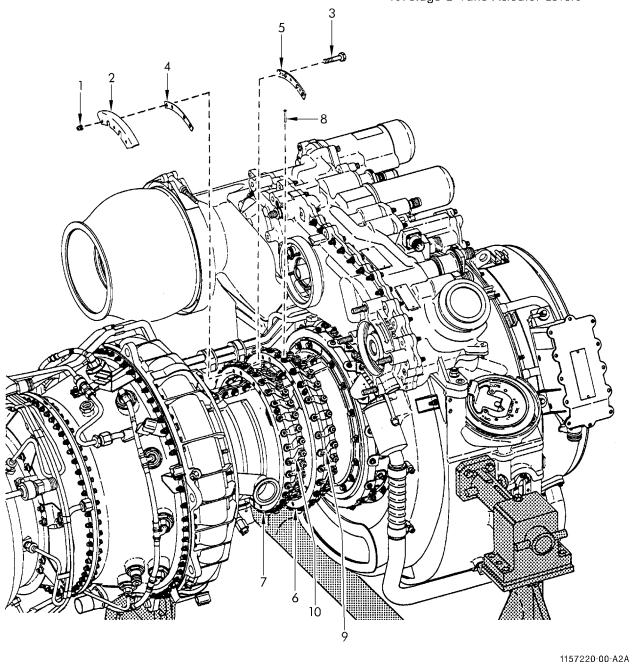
Right-Hand Compressor Case; Removal, Inspection, and Installation (Sheet 1 of 2)
